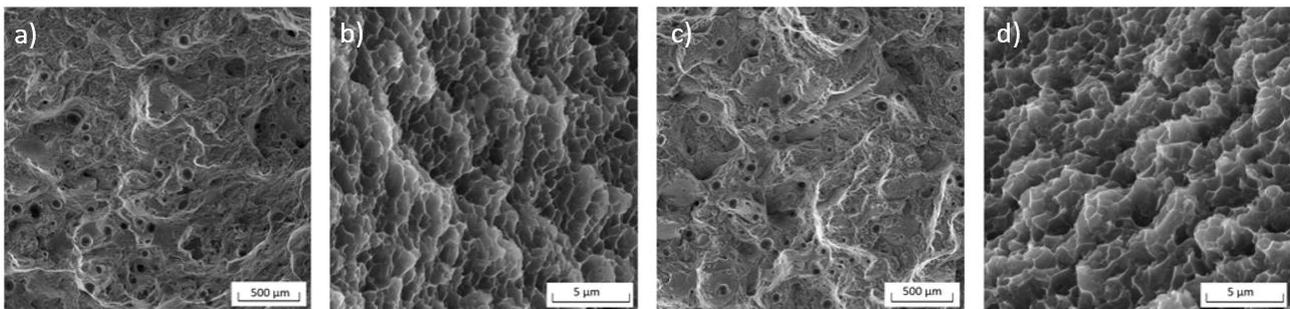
Fracture surfaces of SLM AlSi9Cu3 alloy a) and b) Sample 2, c) and d) Sample 5
